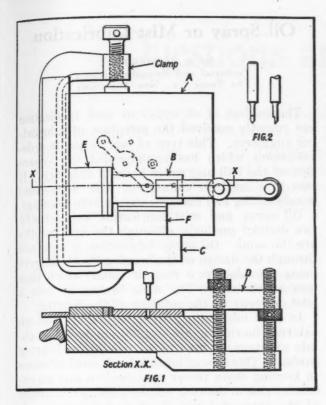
Method of Accurately Locating Holes on the Faces of Blanking and Piercing Dies and on Templets. Fig. 2. Type of Drill Used for Spotting
